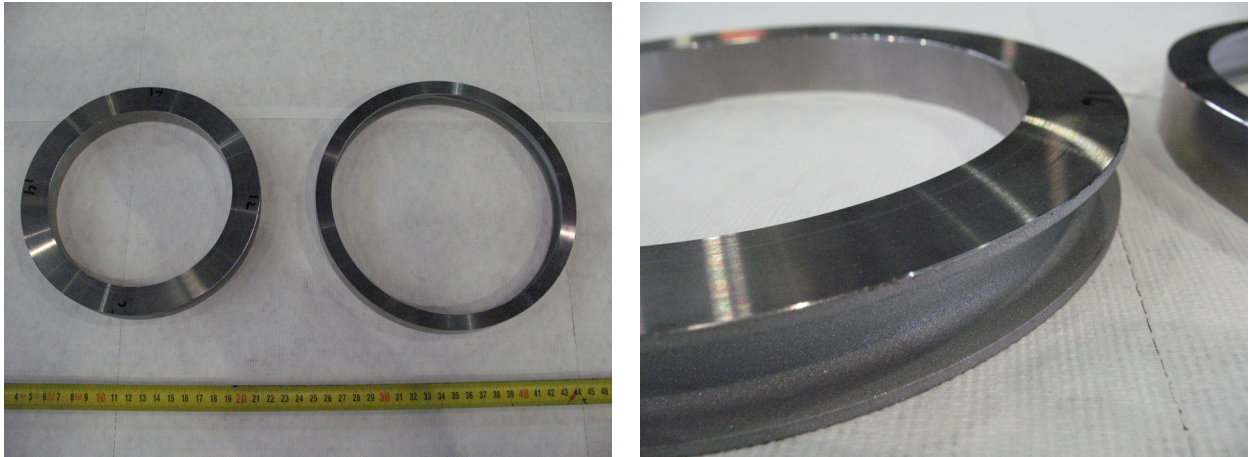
Rings with turned channel halves which will be cut in 900 pieces and then welded to form channel bends. Surface roughness is also fabricated on these surfaces.
